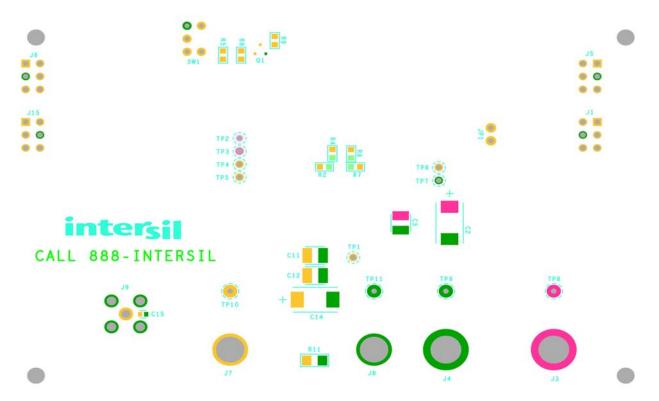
PCB - BOTTOM LAYER (BOTTOM VIEW)
